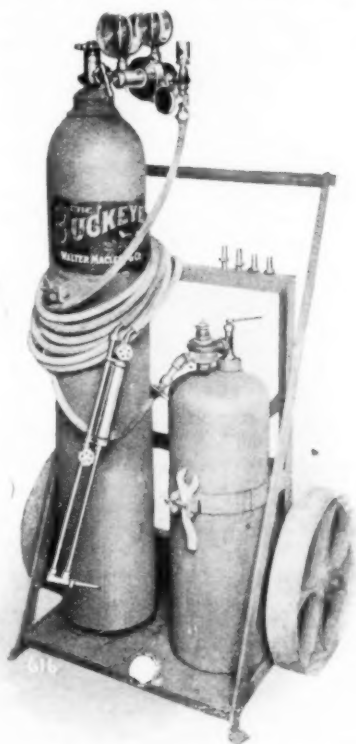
BUCKEYE OXY-ACETYLENE WELDING MACHINE.
